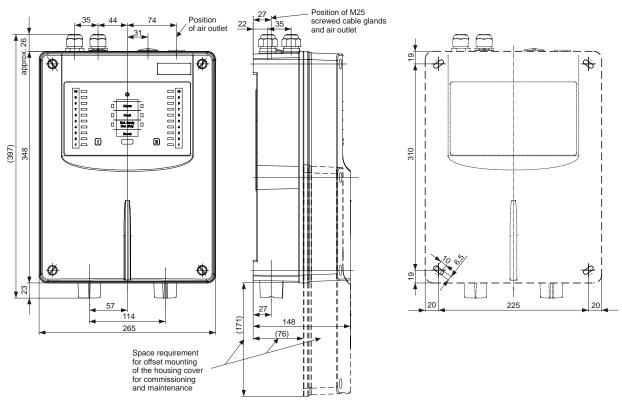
Dimensioned drawing, ASD 535 detector housing drilling plan
